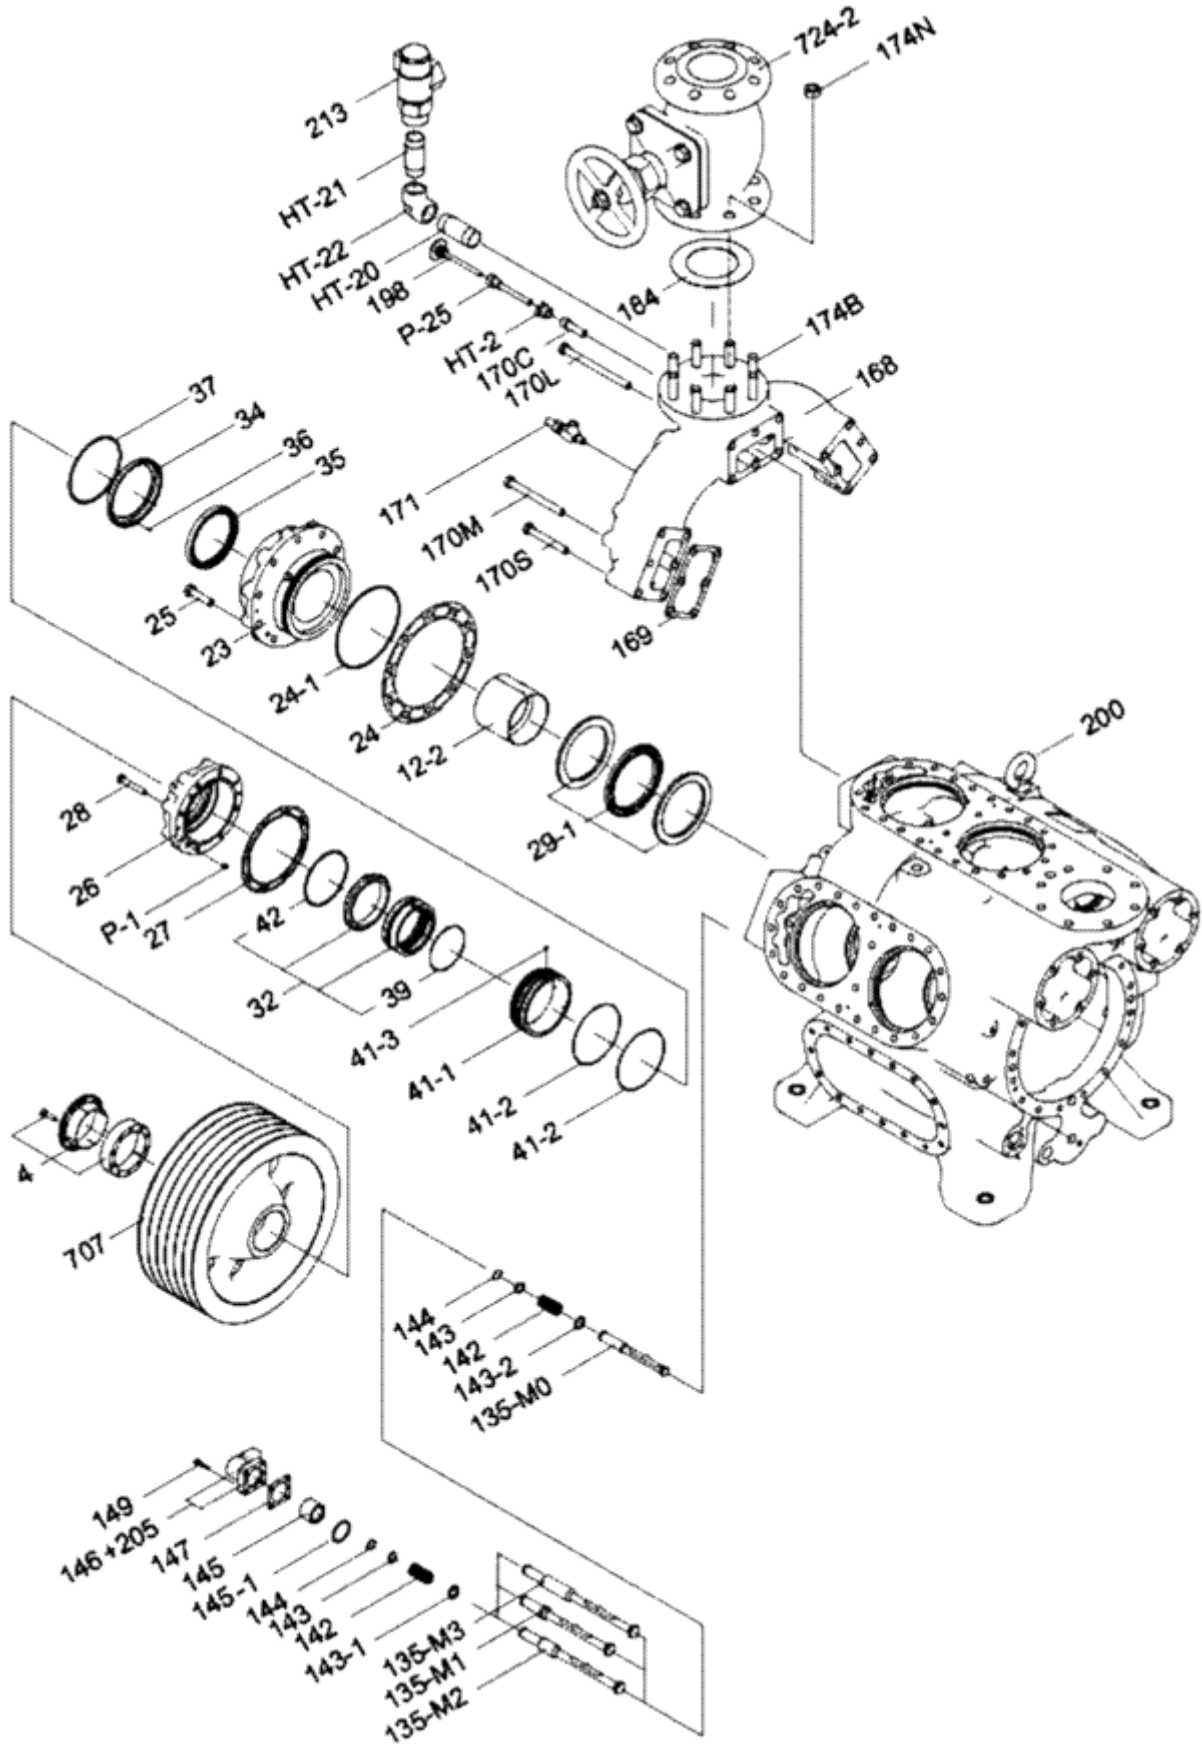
Development view of parts around the 6M case and parts common with others (1/2)
